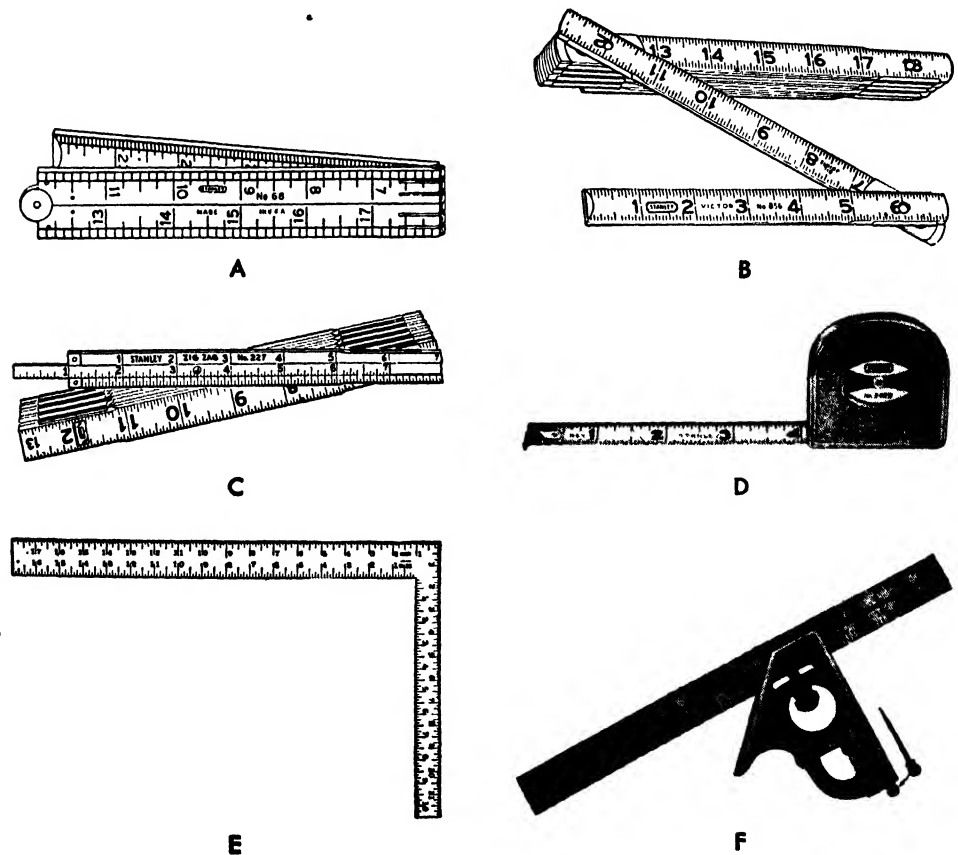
Common measuring and marking tools used in woodwork. A, 2-ft. folding rule; B, zigzag folding rule; C, extension folding rule; D, push-pull pocket tape; E, carpenter's steel square; F, combination square. (Stanley Tools)
